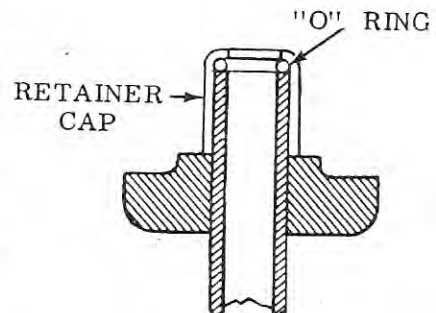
Cross section of intake valve guide showing installation of "O" ring stem seal and retainer. Be sure intake valve spacer is installed with rounded edge toward block.
